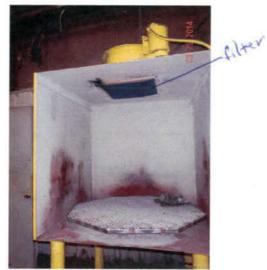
, 3/25/2014 – Inventory item #6 listed on attachment 4B. The facility location is shown on attachment 4B, page 1. D. Newsome
